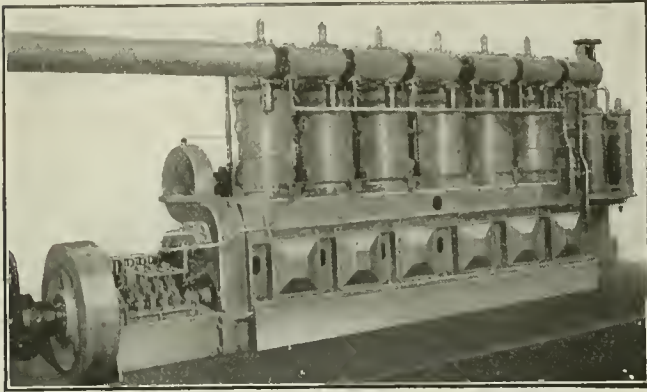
ASSEMBLY OF ENGINE SHOWING CYLINDERS AND OVERHUNG FLYWHEEL
